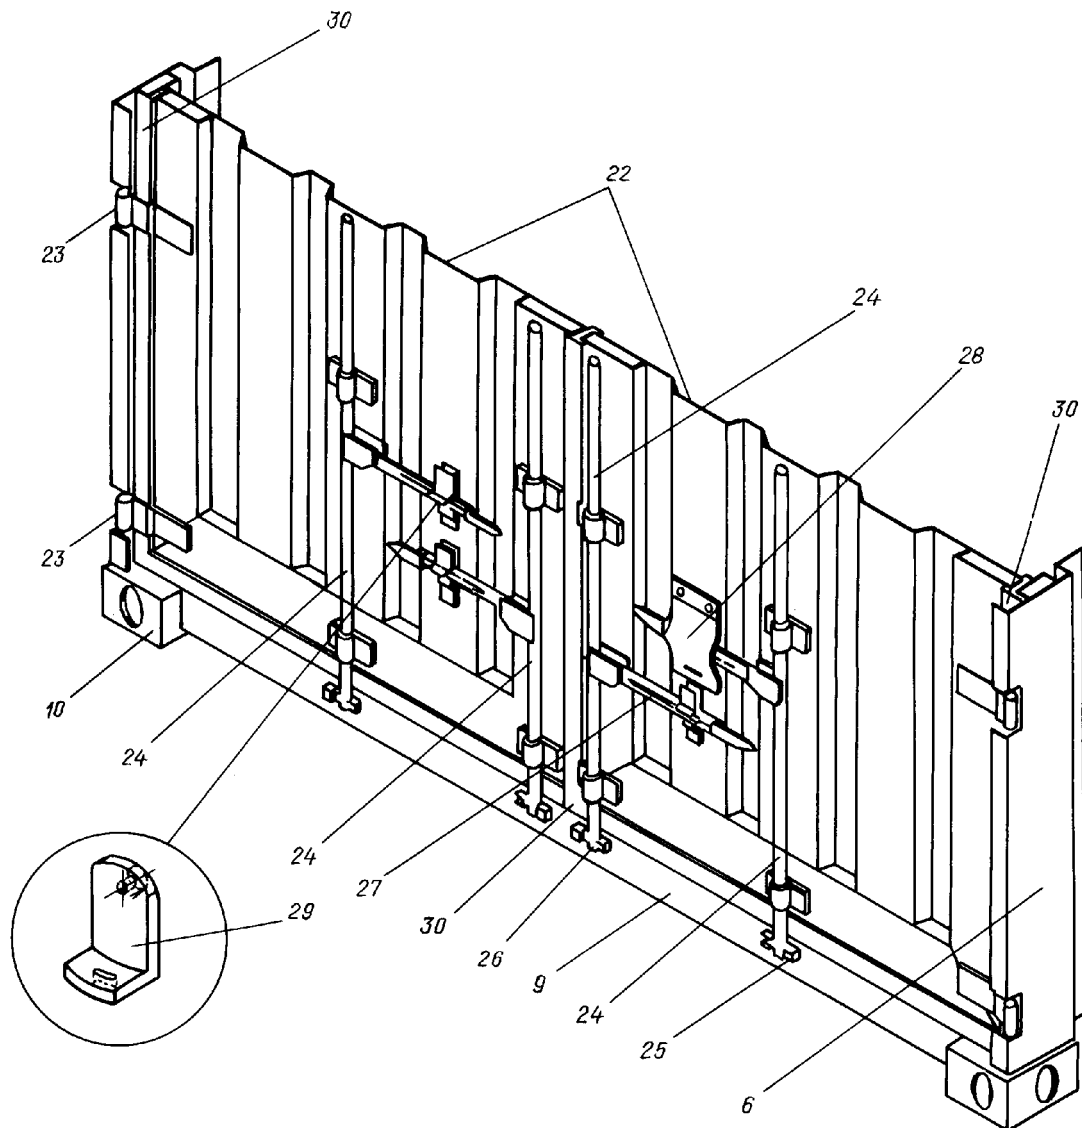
Structural elements of general cargo containers (door):
